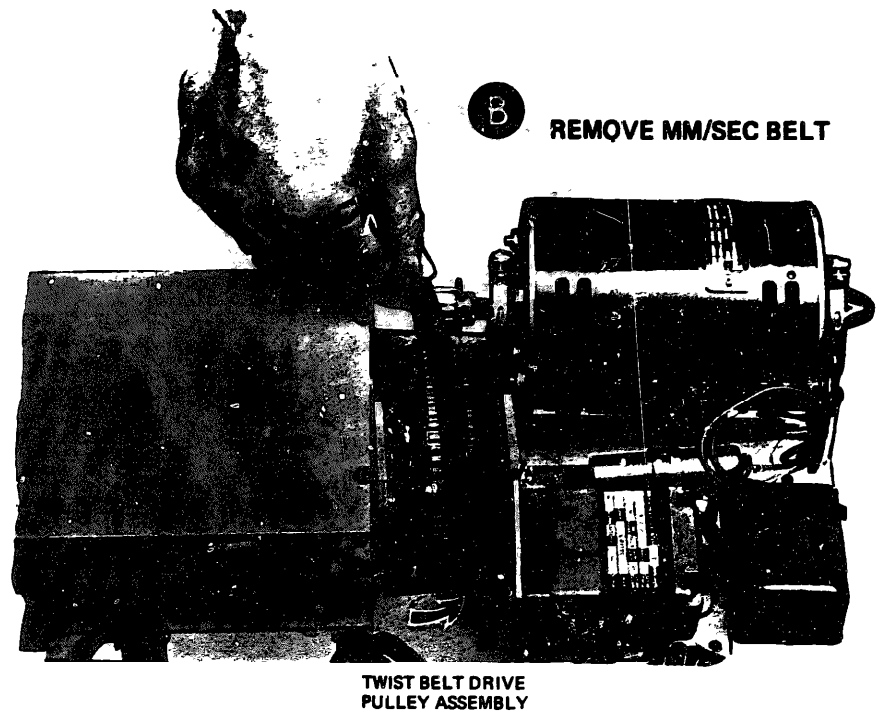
Paper Table Removal, Table Link and Drive Roller Disassembly
